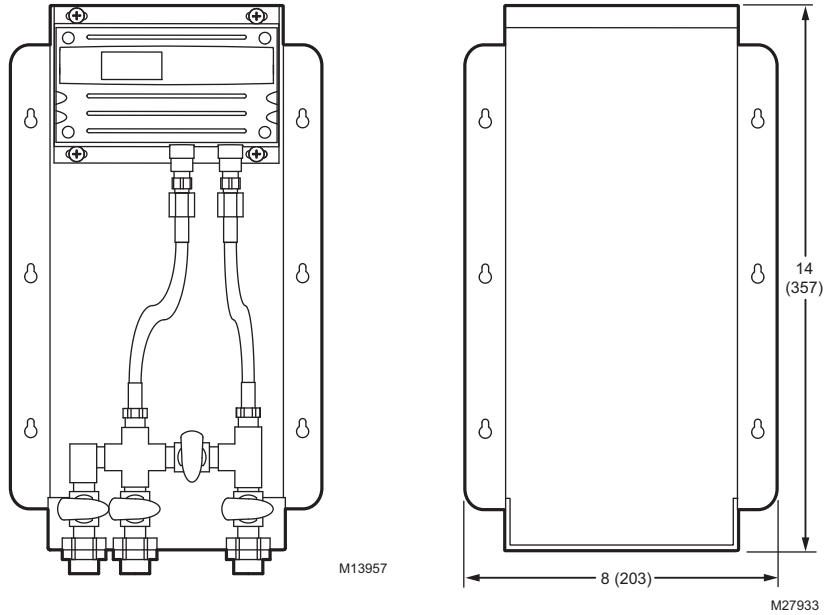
Bypass valve assembly and bracket dimensions in in. (mm).
